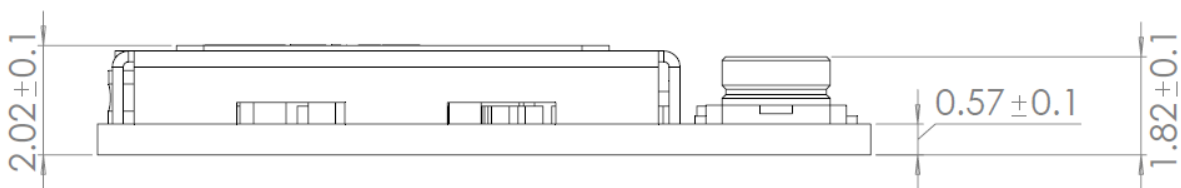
MAYA-W260 Mechanical Specifications (side view)
